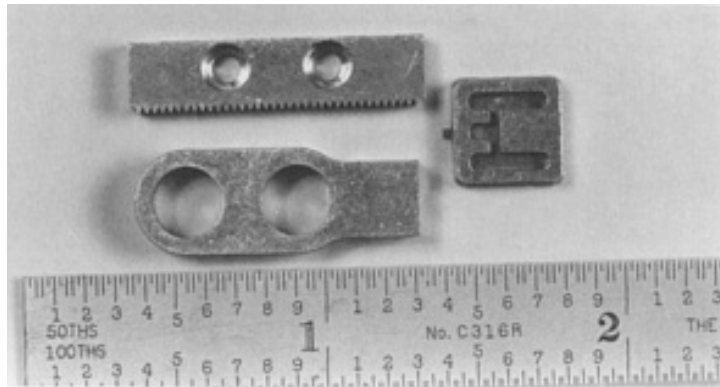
Typical pressed and sintered aluminum P/M parts made from alloy 601AB. Top: gear rack used on a disc drive. Bottom: link flexure used on a print tip for a typewriter. Right: header/cavity block used on a high-voltage vacuum capacitor. Courtesy of D. Burton, Perry Tool & Research Company
